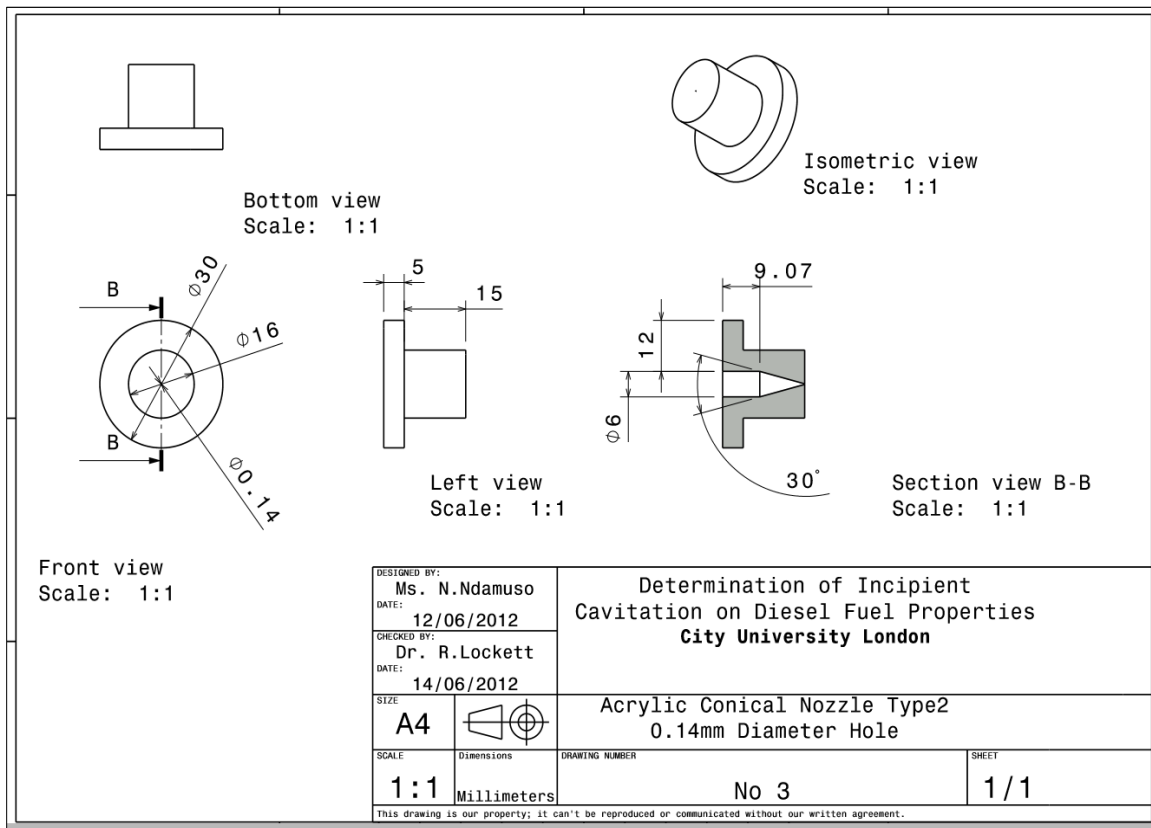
Acrylic Conical nozzle, 14mm hole diameter
